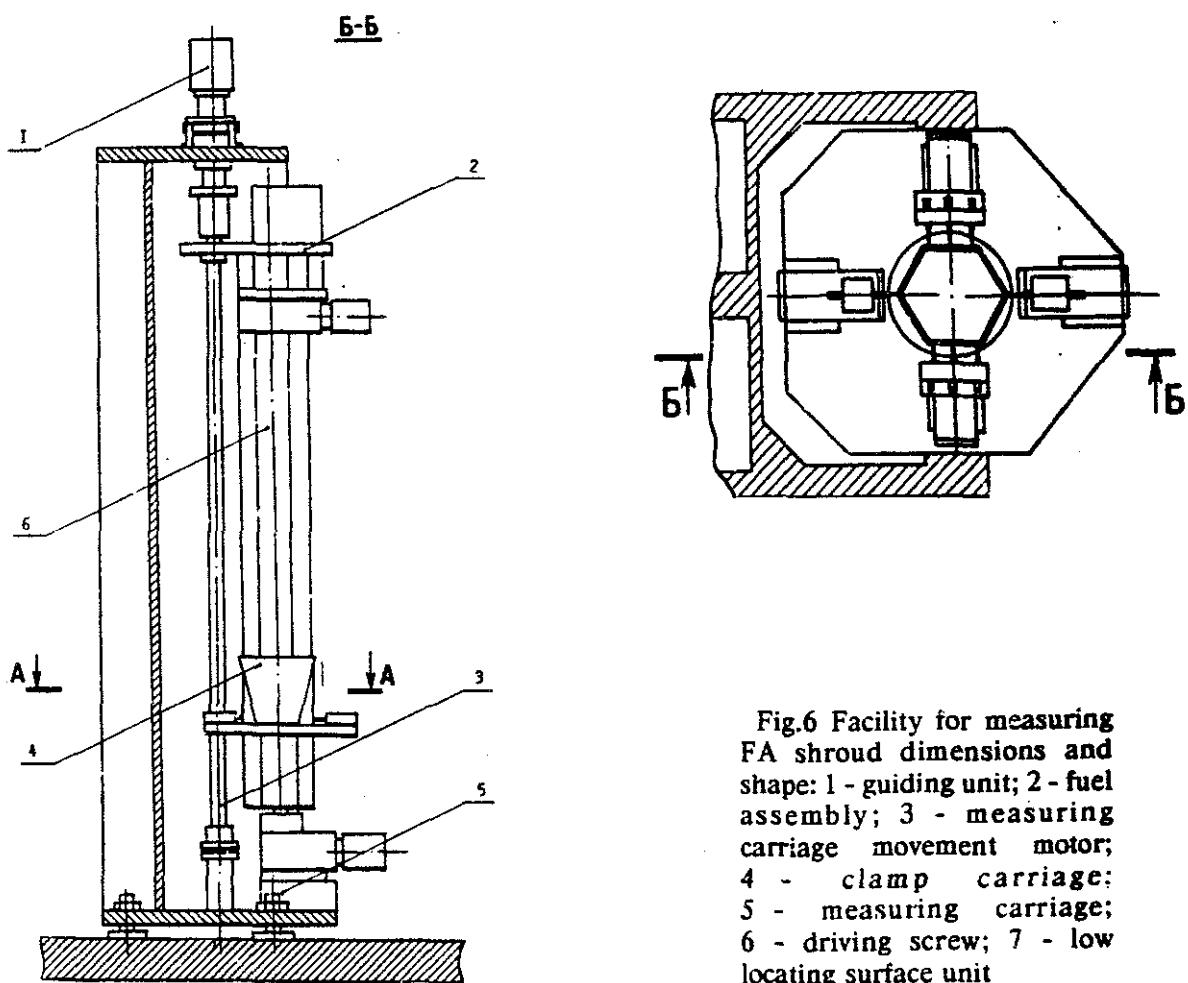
Facility for measuring FA shroud dimensions and shape: 1 - guiding unit; 2 - fuel assembly; 3 - measuring carriage movement motor; 4 - clamp carriage; 5 - measuring carriage; 6 - driving screw; 7 - low locating surface unit
